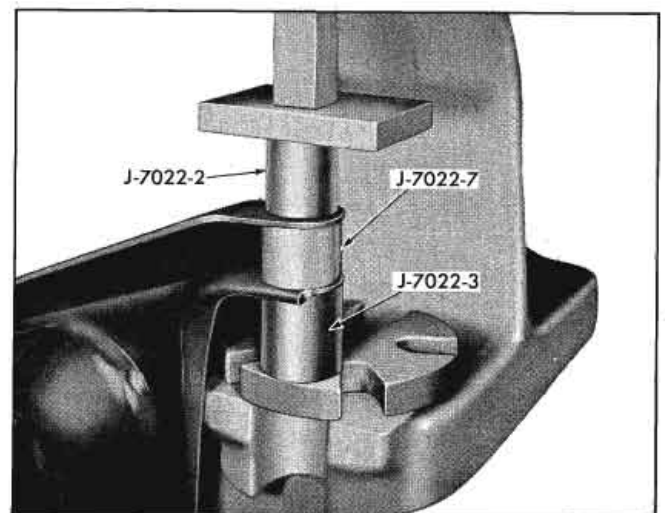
Installing Rear Bushing in Front Lower Control Arm
